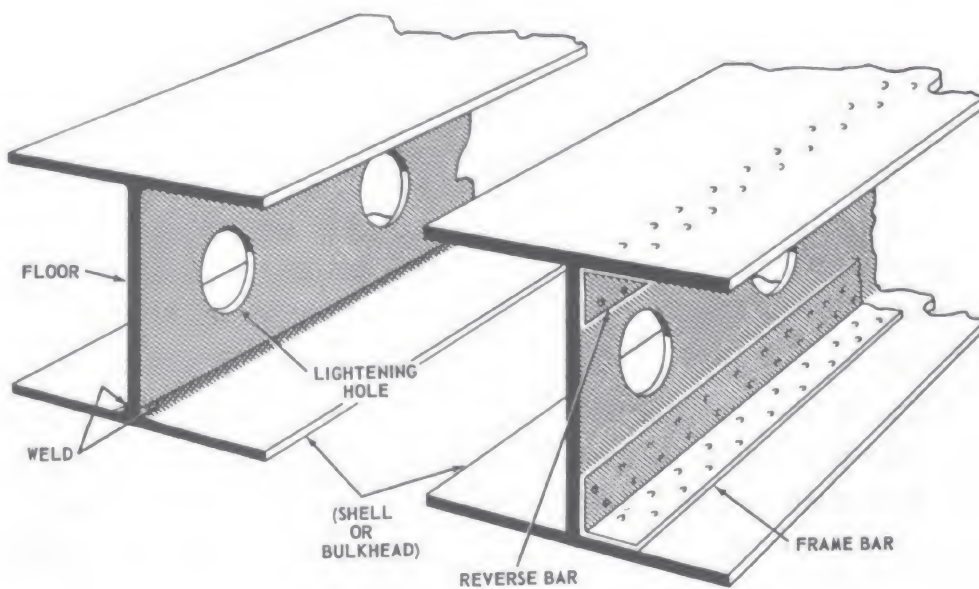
Examples of built-up shapes; diagram on the left shows welded construction; diagram on right shows riveted construction.
